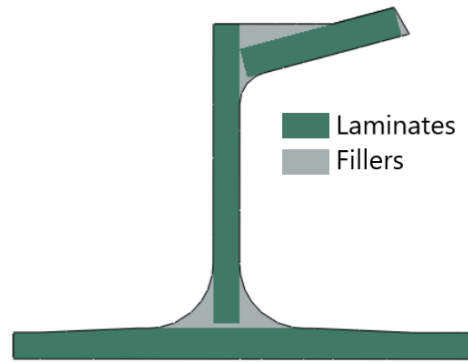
3-stringer panel skin-stringer assembly schematic
